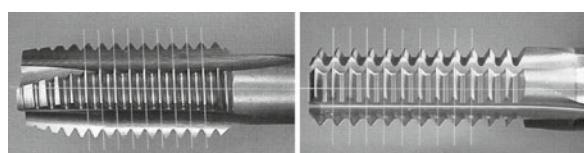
Screw tap with coil (left) and milling cutter without coil (right), according to Fraisa
